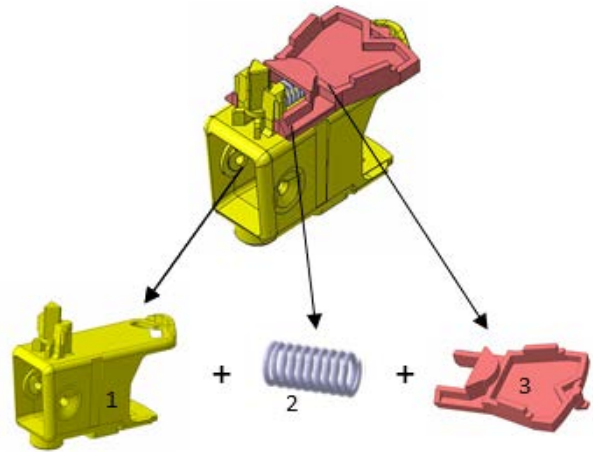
Assembly process of an assembled unit (Pivot part): base (1), spring (2) and slider (3).
